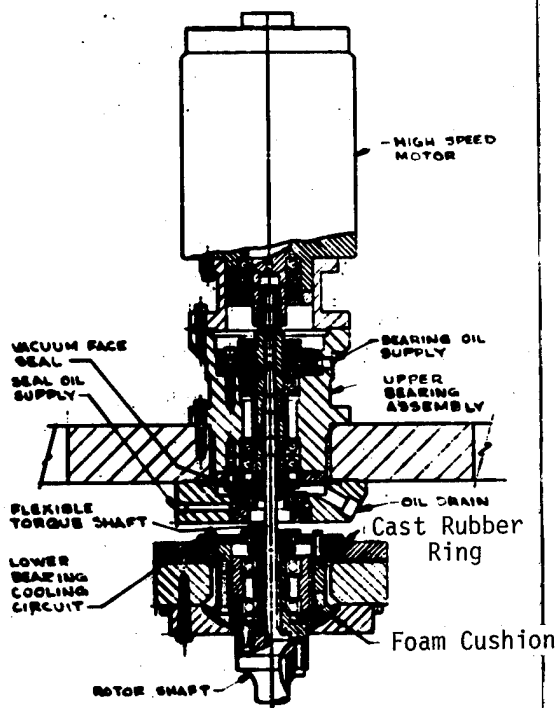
Flywheel Bearing Support Shown with Induction Motor.
